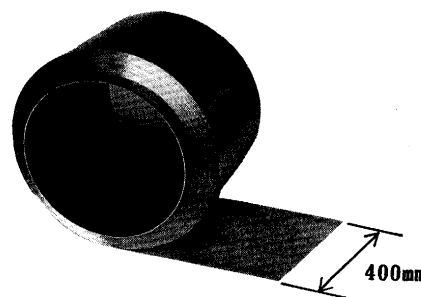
Strip of 30Cr-14Ni alloy for over-layer welding (after edge-trimming and descaling).
